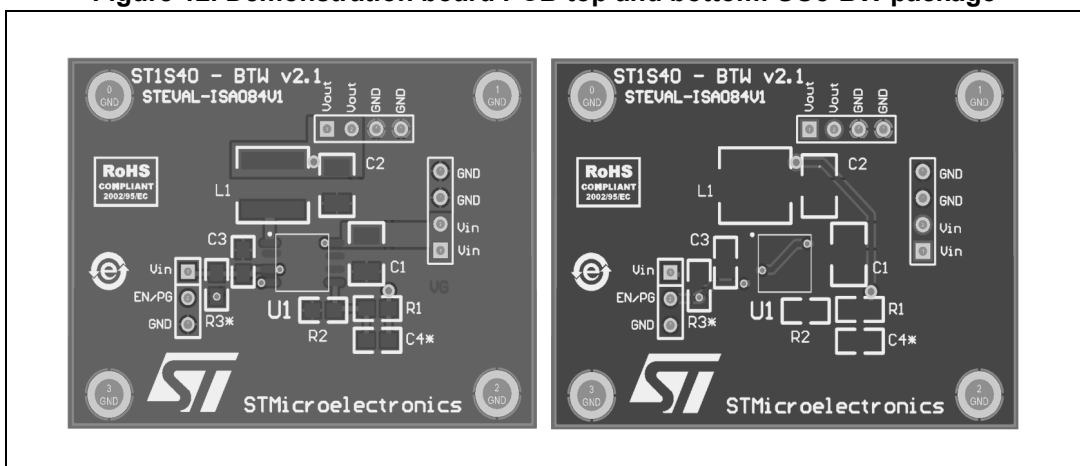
Demonstration board PCB top and bottom: SO8-BW package
